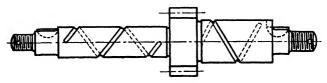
STANDARD OIL PUMP DRIVING SPINDLE
